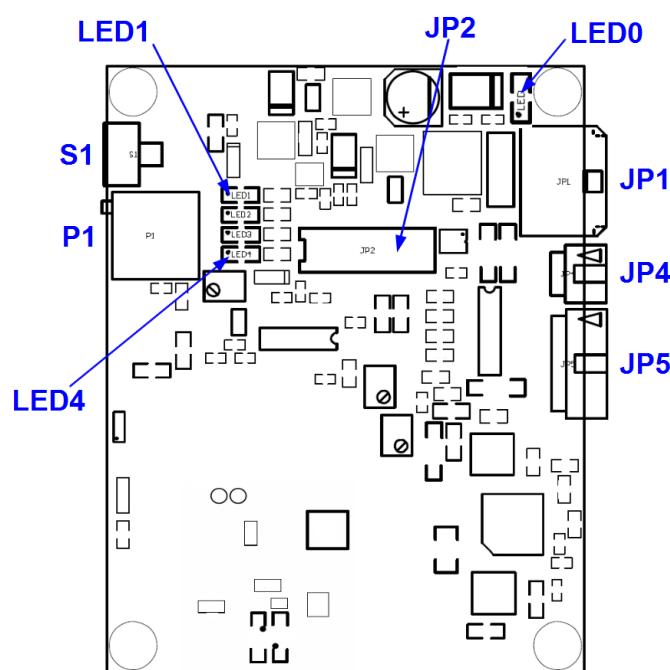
Schematic top view of the EBD5100 indicating the user interfaces
